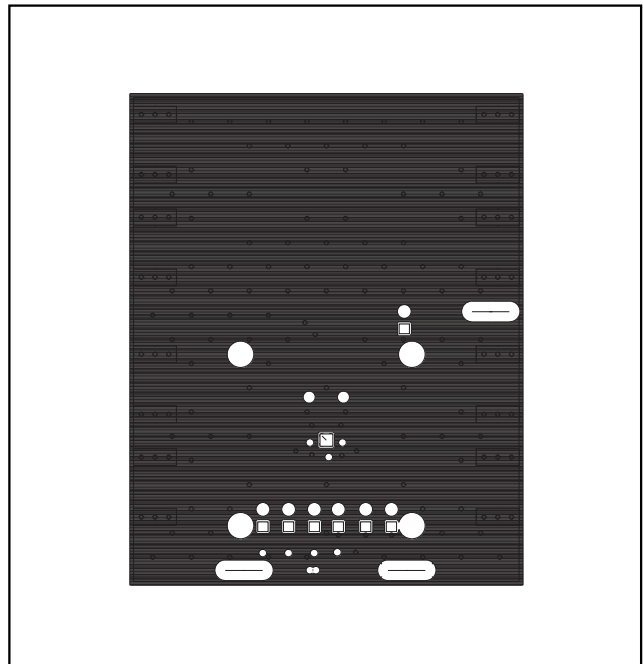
MAX3274 EV Kit PC Board Layout—Solder Side
